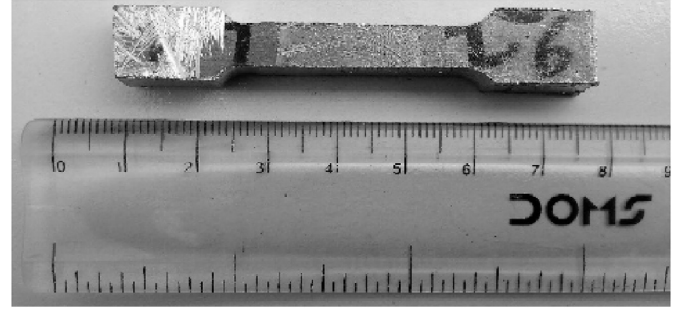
Dimension of tensile test specimen as per ASTM E8.
